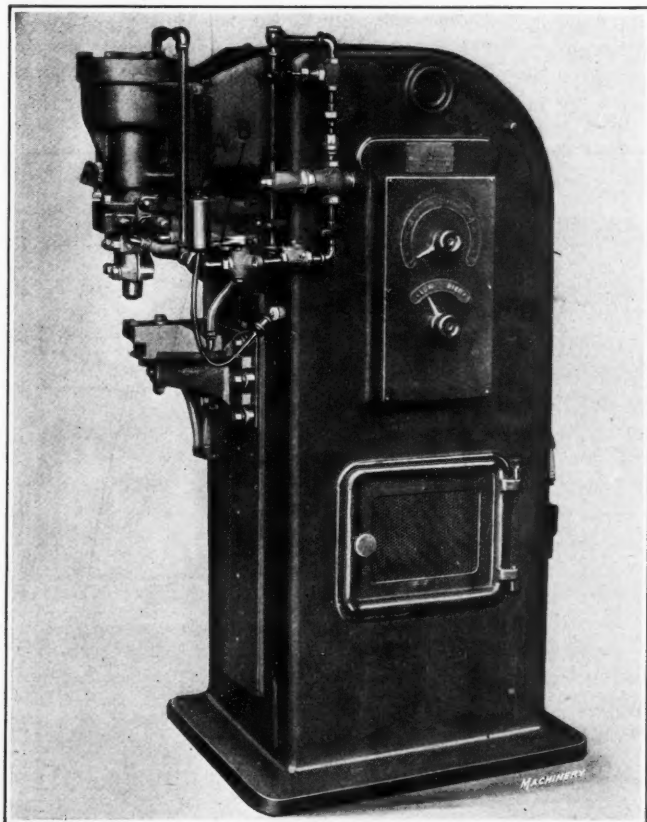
Special Toledo Electric Welding Machine fitted with Air Cylinder and Three-port Valve for operating Electrode and Steel Riveting Die—Steel Riveting Die not shown in Position
